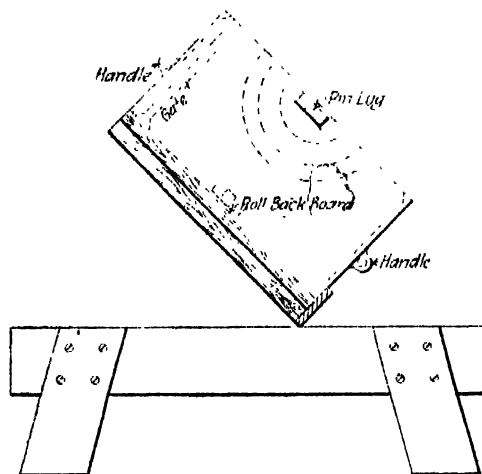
Rolling Rammed Cope on Roll-Back Board Preparatory to Drawing Pattern, or to Closing the Mold after the Pattern Is Drawn
